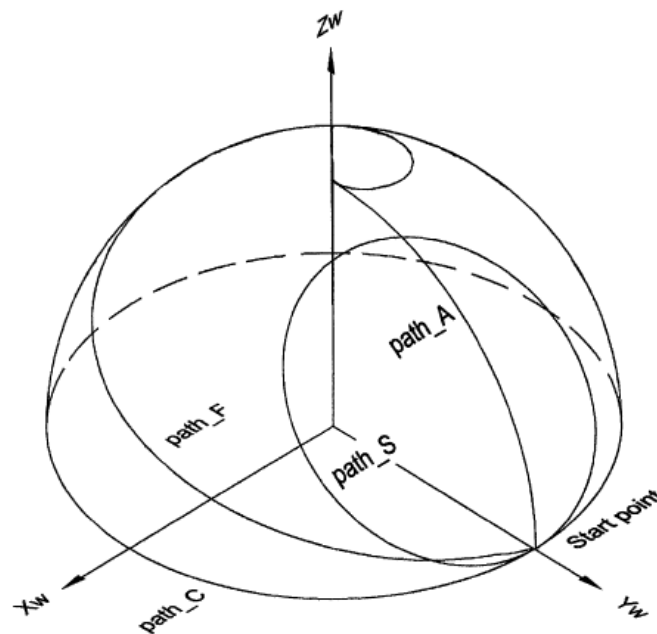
Proposed test paths for the 3D probe-ball device (Lei and Hsu 2002)
